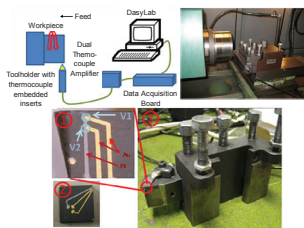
Temperature measurement set-up, (1) flank face of the insert, (2) bottom view of the insert, (3) toolholder used.
